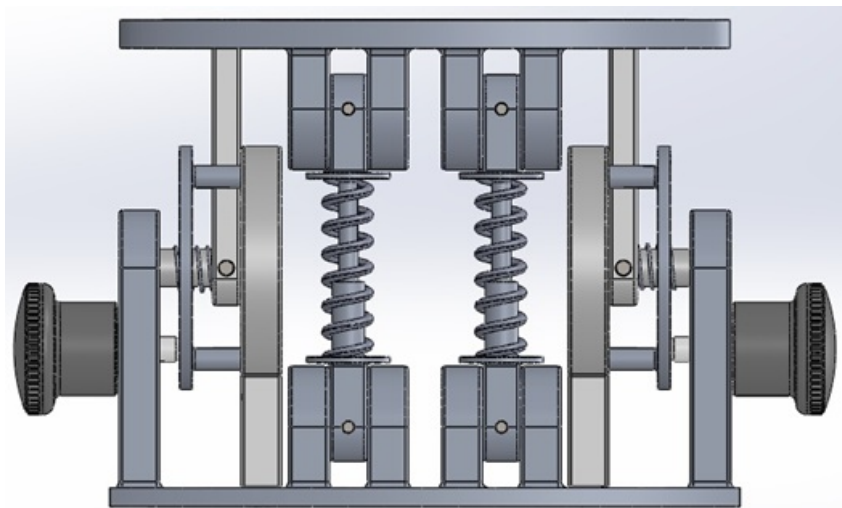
Frontal view of the module for the flexion-extension of a passive prosthetic wrist. The module is in rigid modality: small piston push the wheel towards the inner element of the external hinge and the pivots of the wheel are engaged in the holes.
